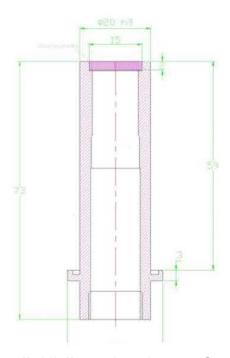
UV Sensor Detail. All dimensions in mm. (Source: ATG)
